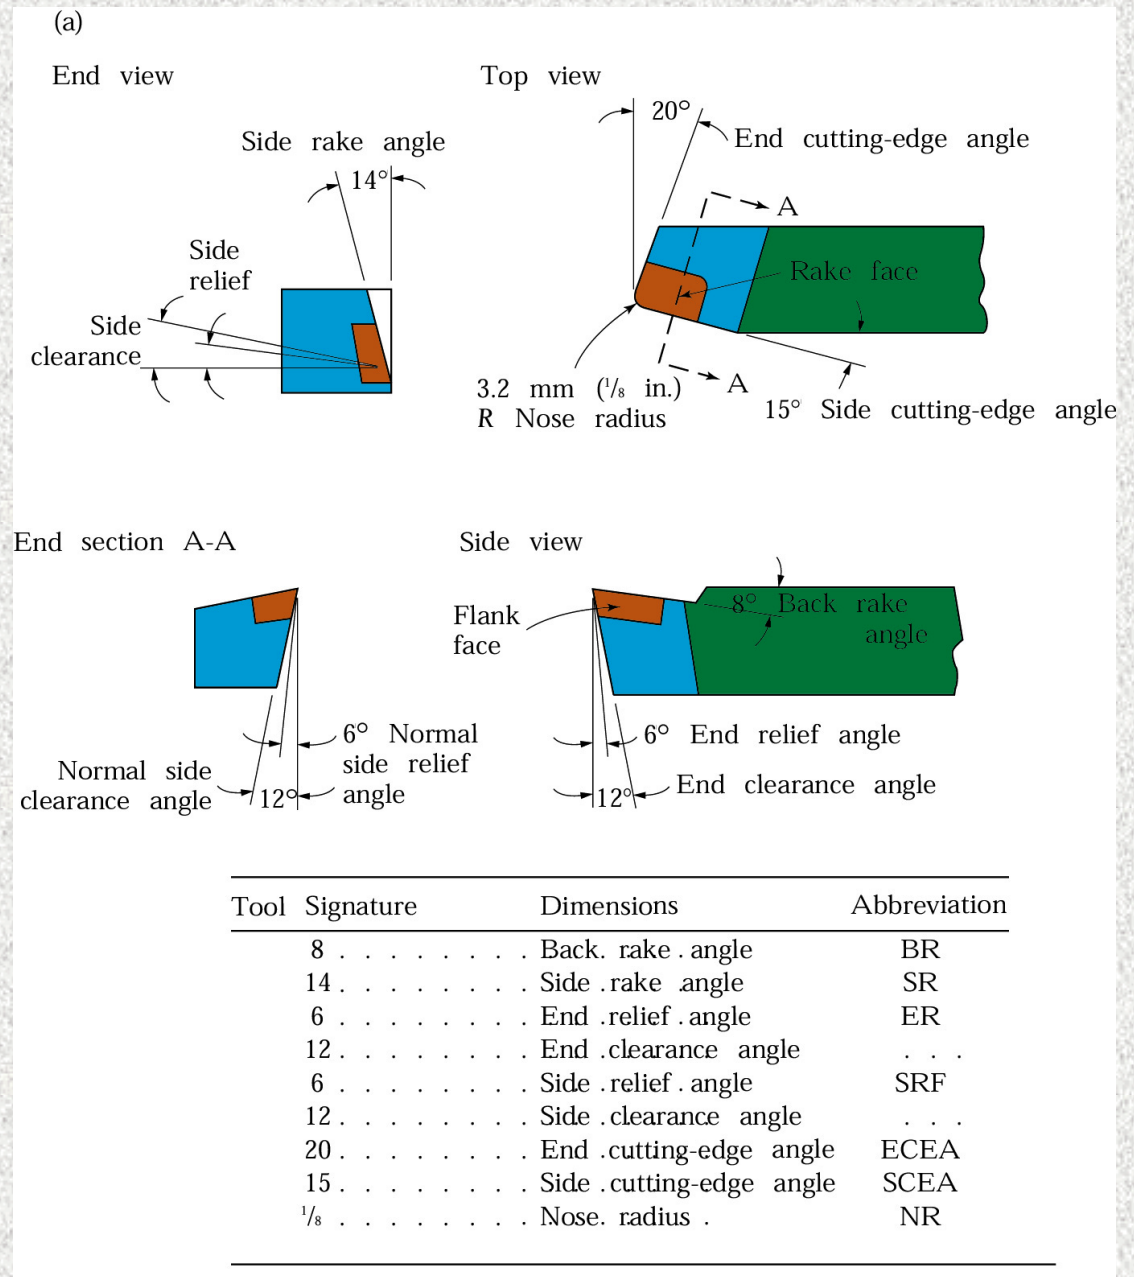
(a) Designations and symbols for a right-hand cutting tool; solid high-speed-steel tools have a similar designation. Right-hand means that the tool travels from right to left as shown in Fig. 22.1a. (continued)
